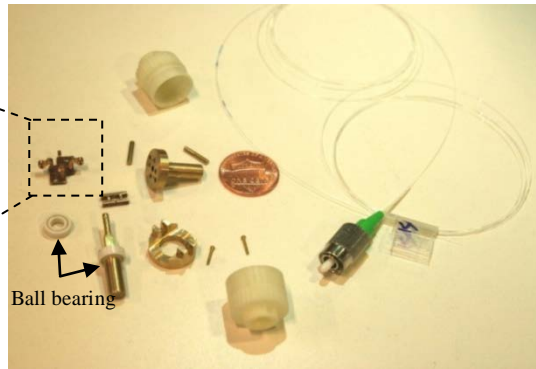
The exploded view of the final fabricated parts (See fig. 3(a) for labels of the parts).
